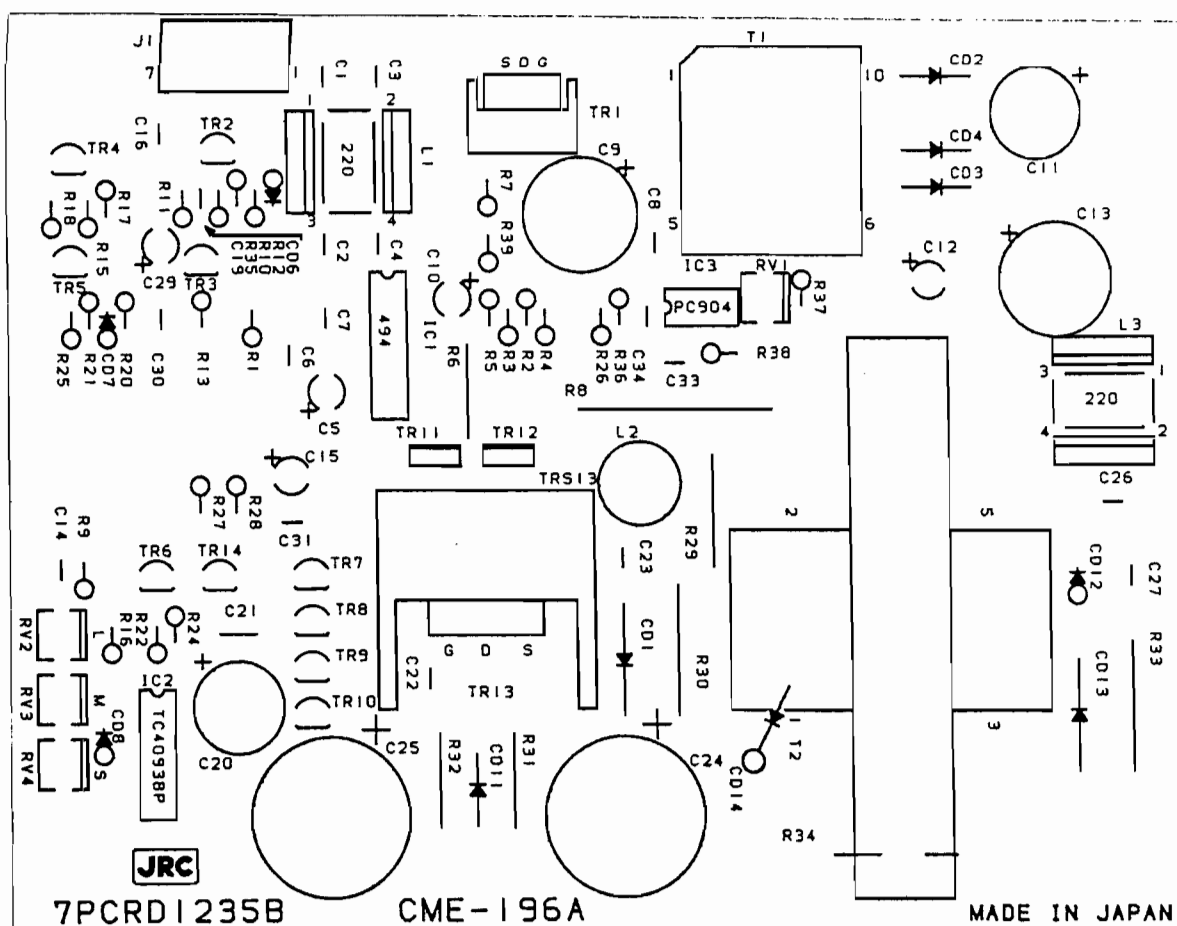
COMPONENT LOCATION DRAWINGS, MODULATOR PCB (CME-196A)
